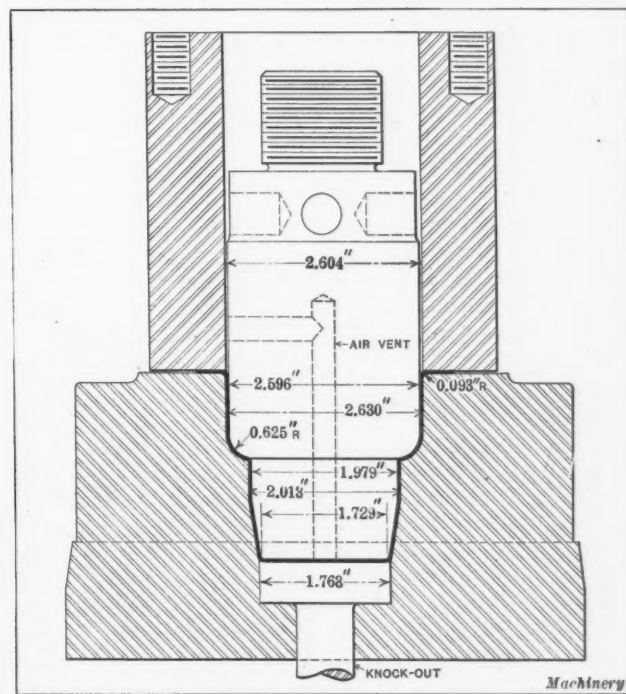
Forming the Shell to the Shape shown and flattening the Small End
